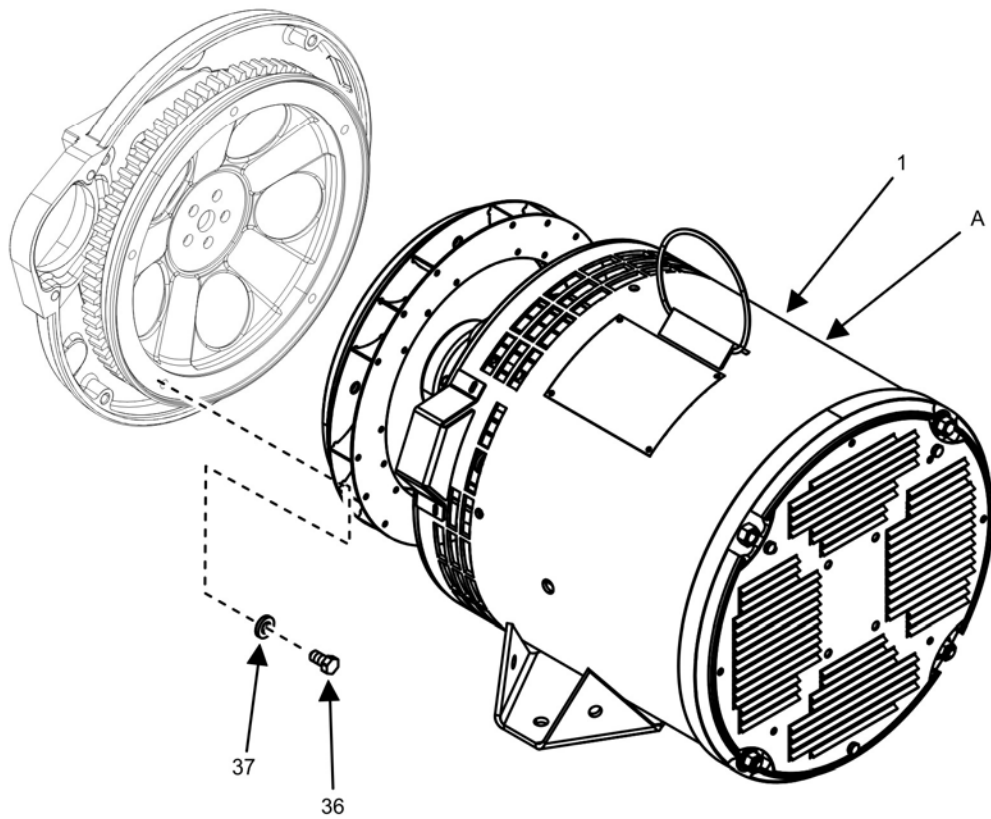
AC Generator Assembly, 50/60 Hz (Sheet 1 of 3).
